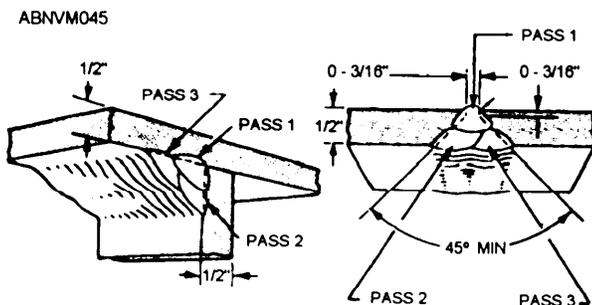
Joint design and weld pass sequence overhead-position multipass fillet and butt welds.
